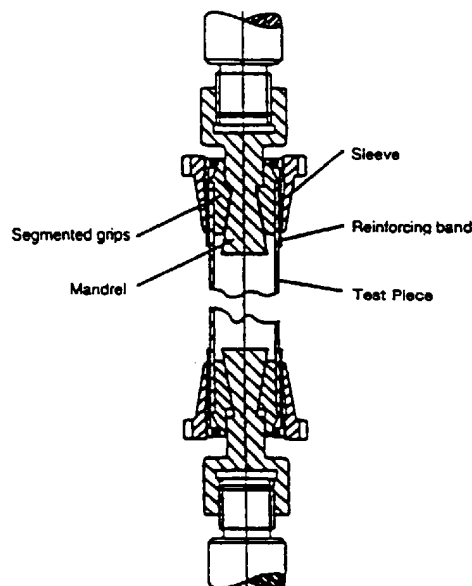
Typical grips for a pipe section test piece (method B) (see 5.3)
